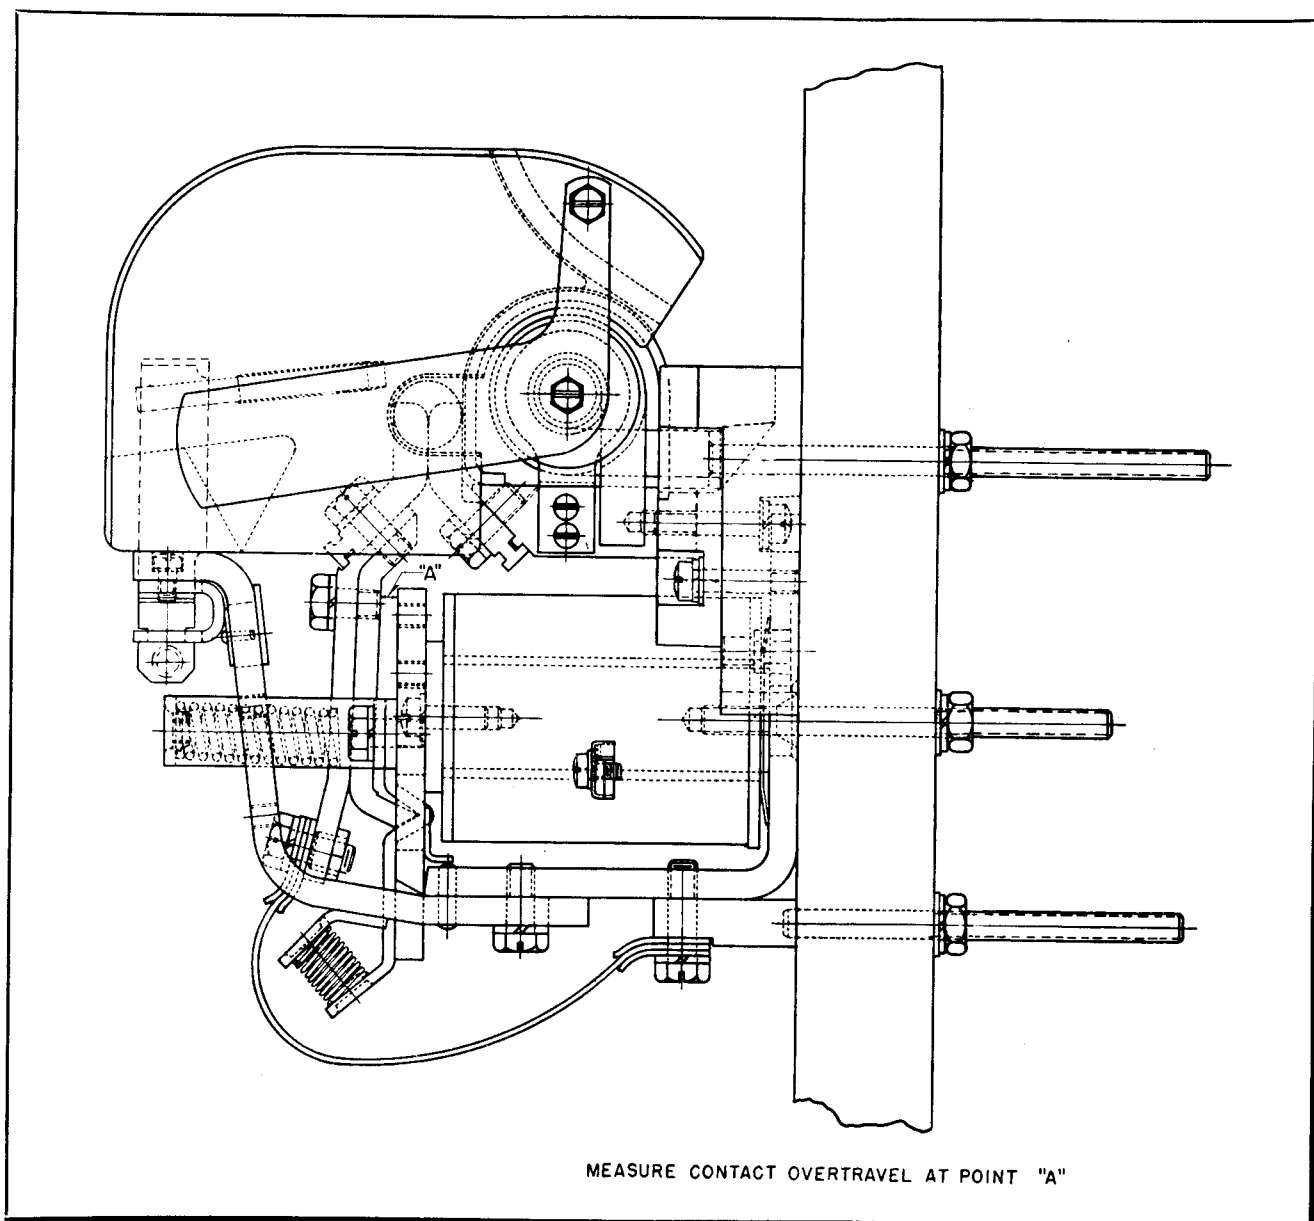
Sectional View of Type M-410 Contactor with Armature Closed
